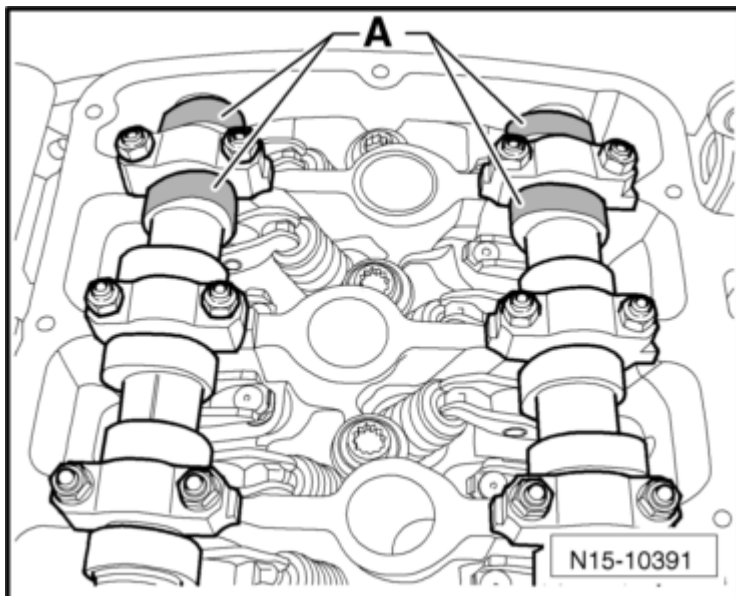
Camshaft Lobes For Cylinder Facing Each Other
